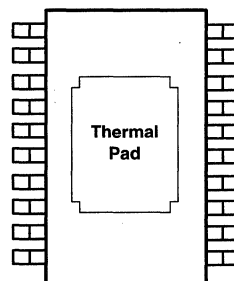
Bottom View of PWP Package, Showing the Thermal Pad
